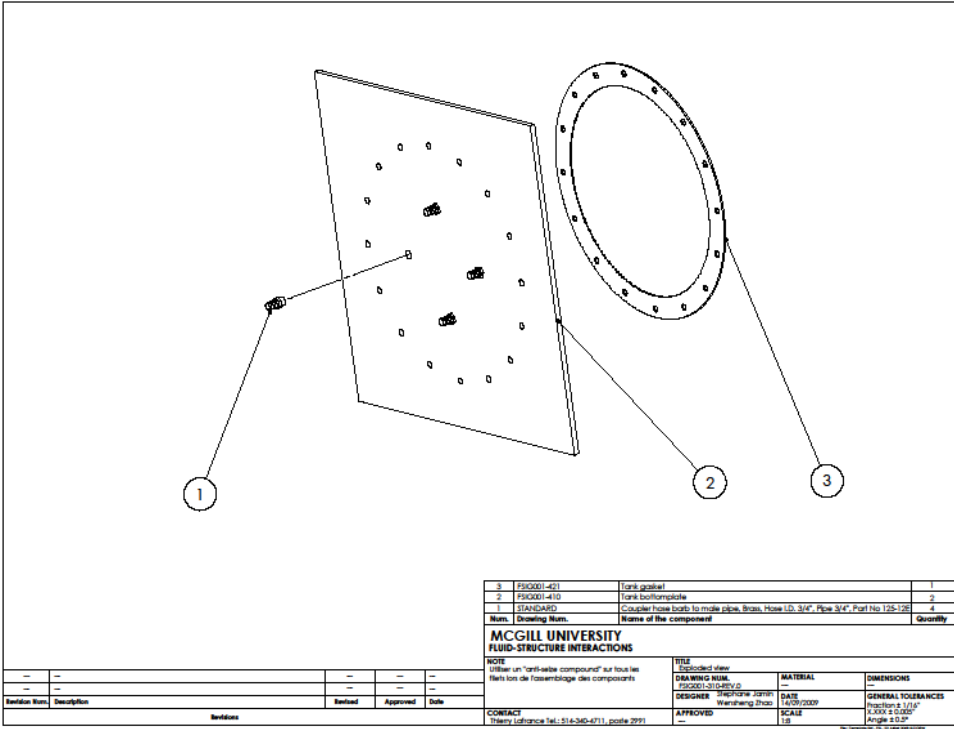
Sub-assembly drawing for the tank: Bottom of the tank
